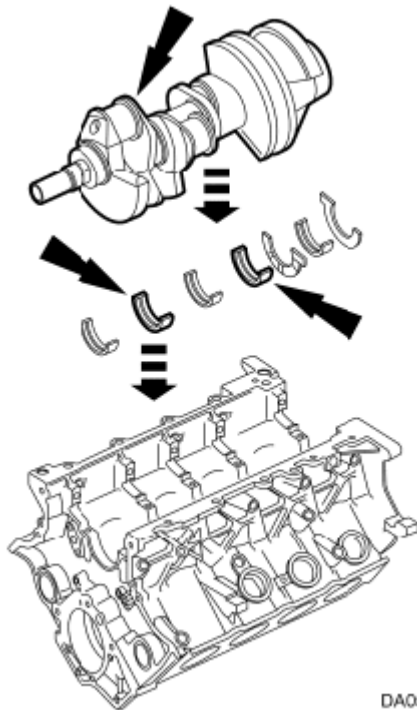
Installing Crankshaft Onto Upper Crankshaft Main Bearings
